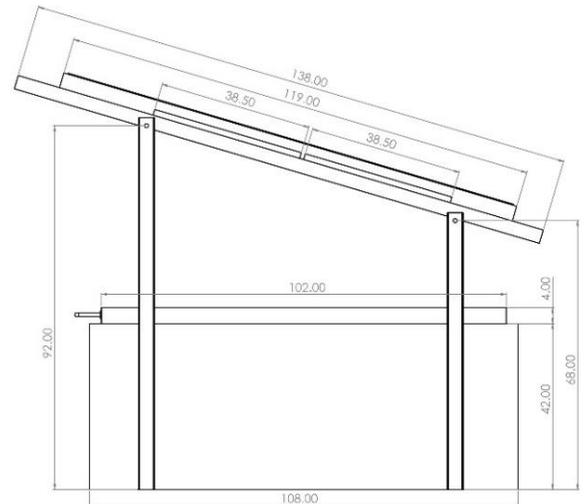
C. Side view dimensions of MSD (dimensions in inches).
